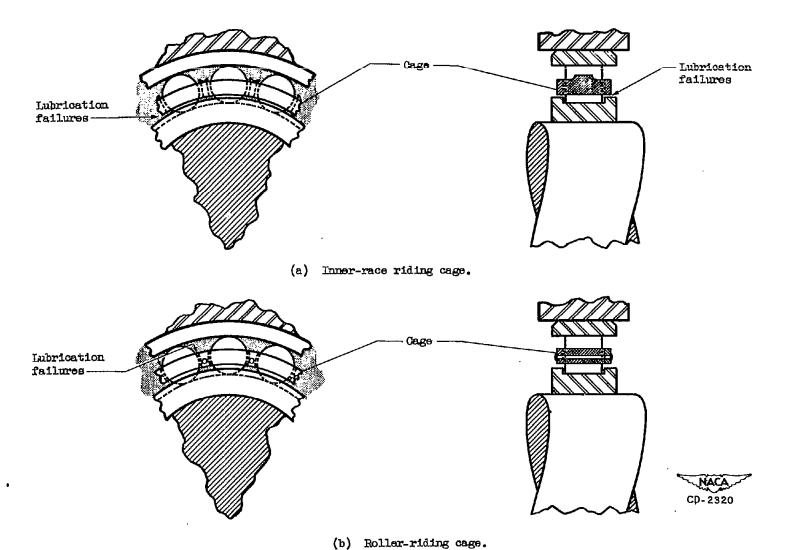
Location of lubrication failures at cage locating surfaces of rolling contact bearings.
